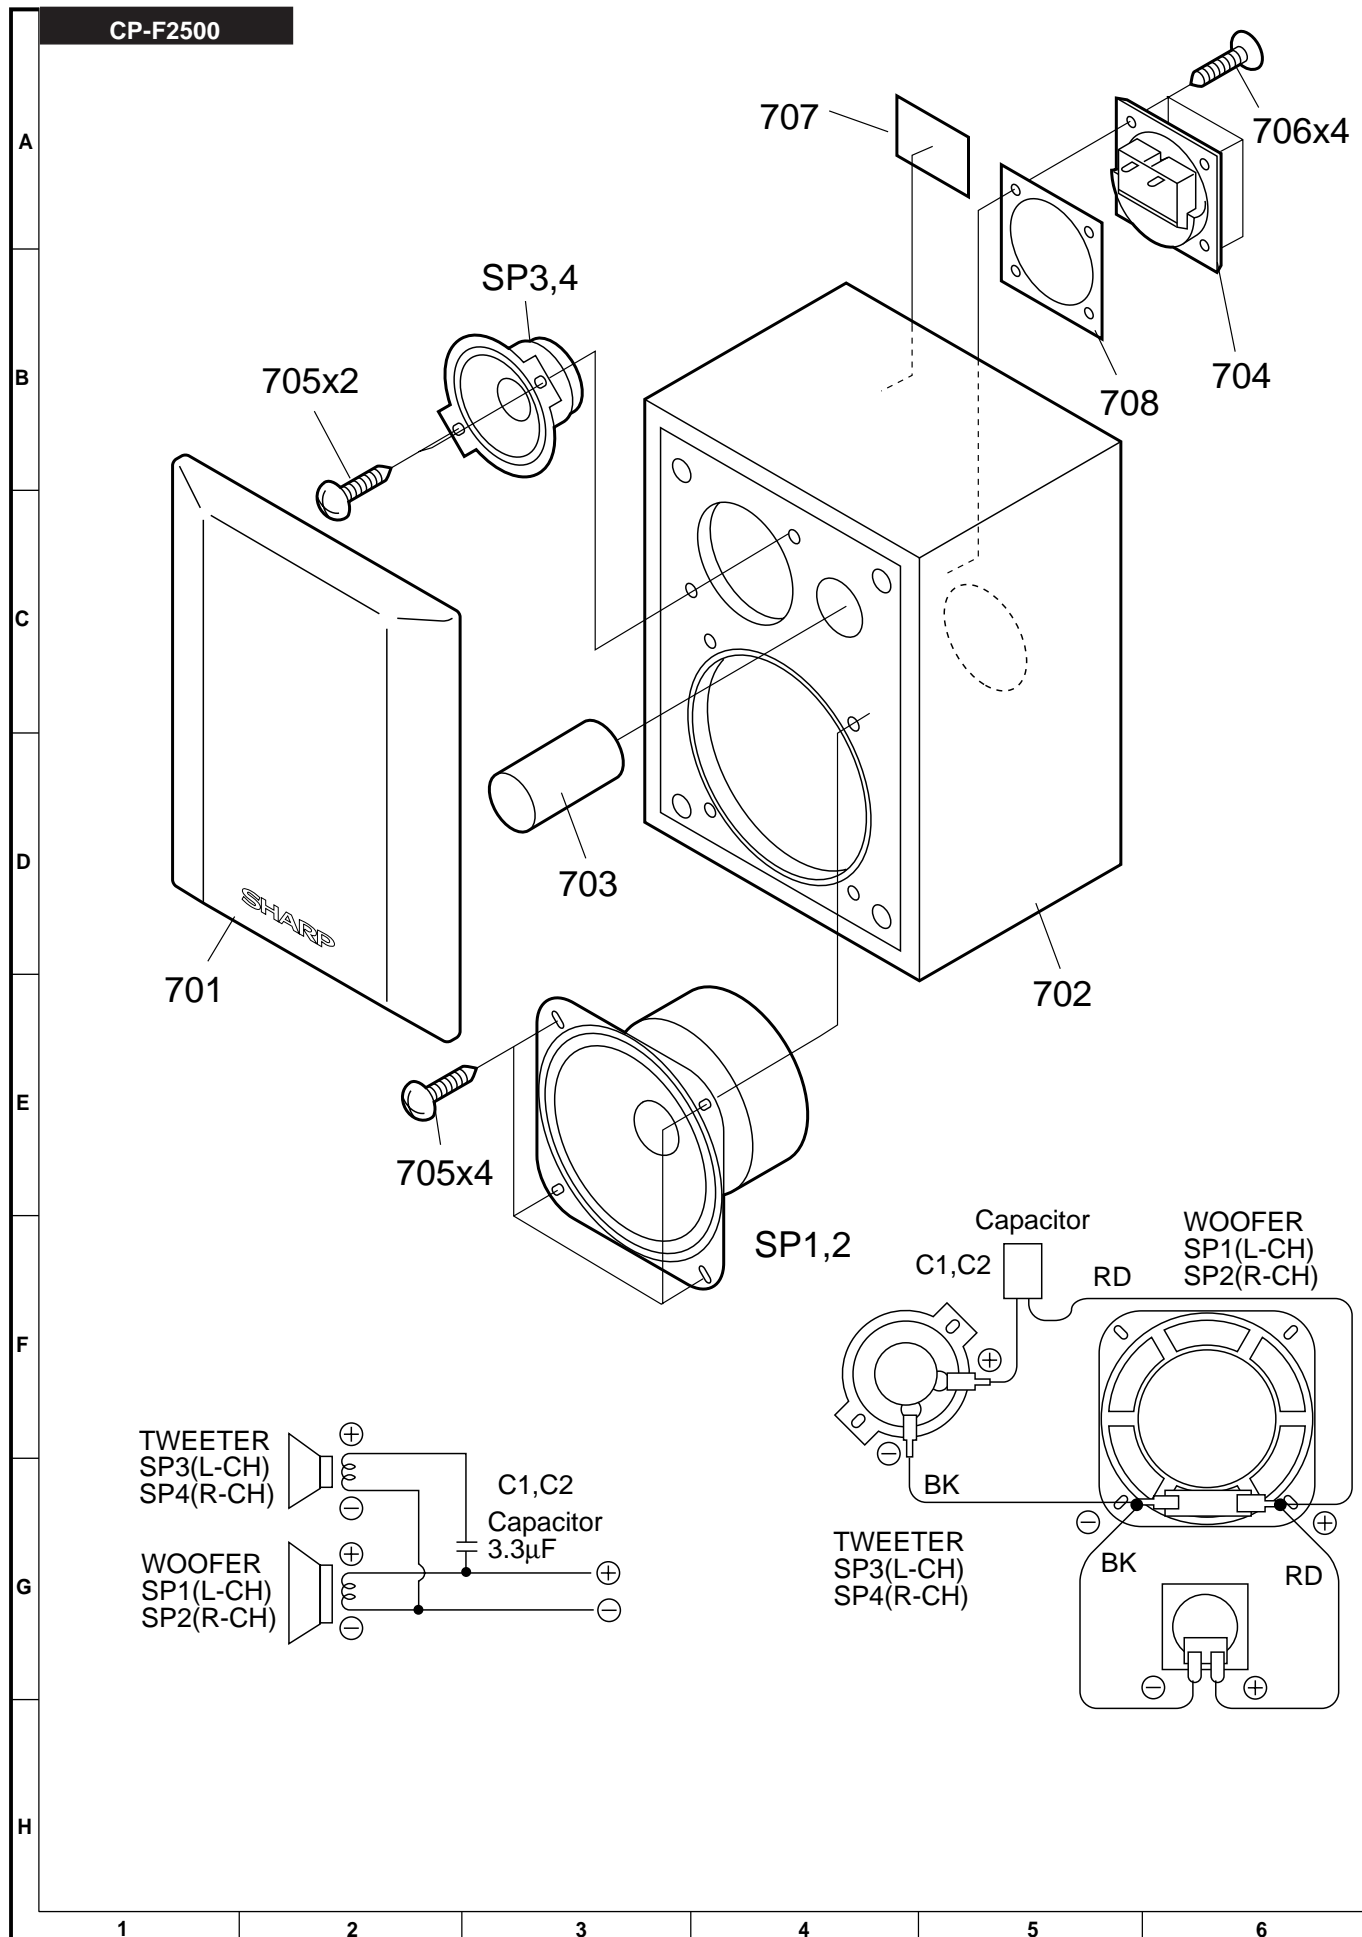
SPEAKER EXPLODED VIEW (1/3)
